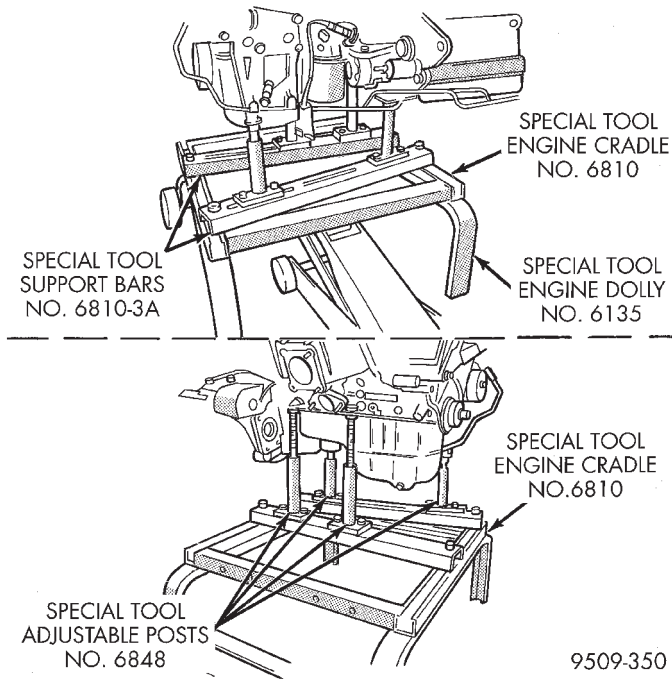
Positioning Engine Cradle SupportPost Mounts
